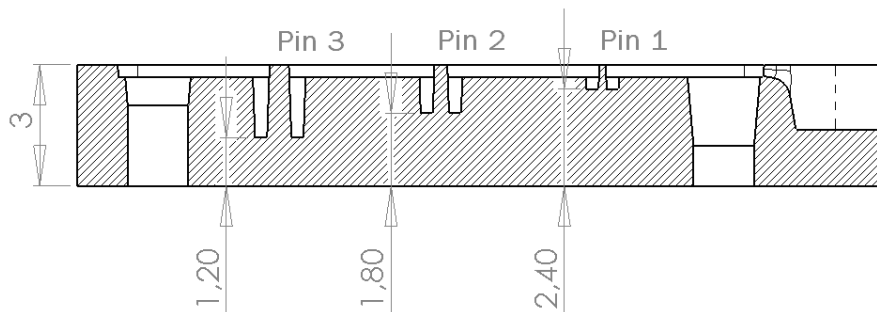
Cross-section of the BA01SLA moulding block (dimensions in mm)
